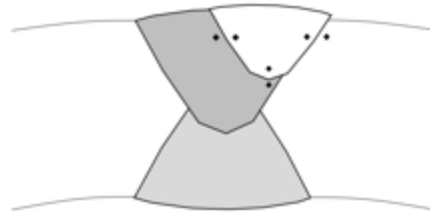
Weld Repair Charpy Sampling Locations
